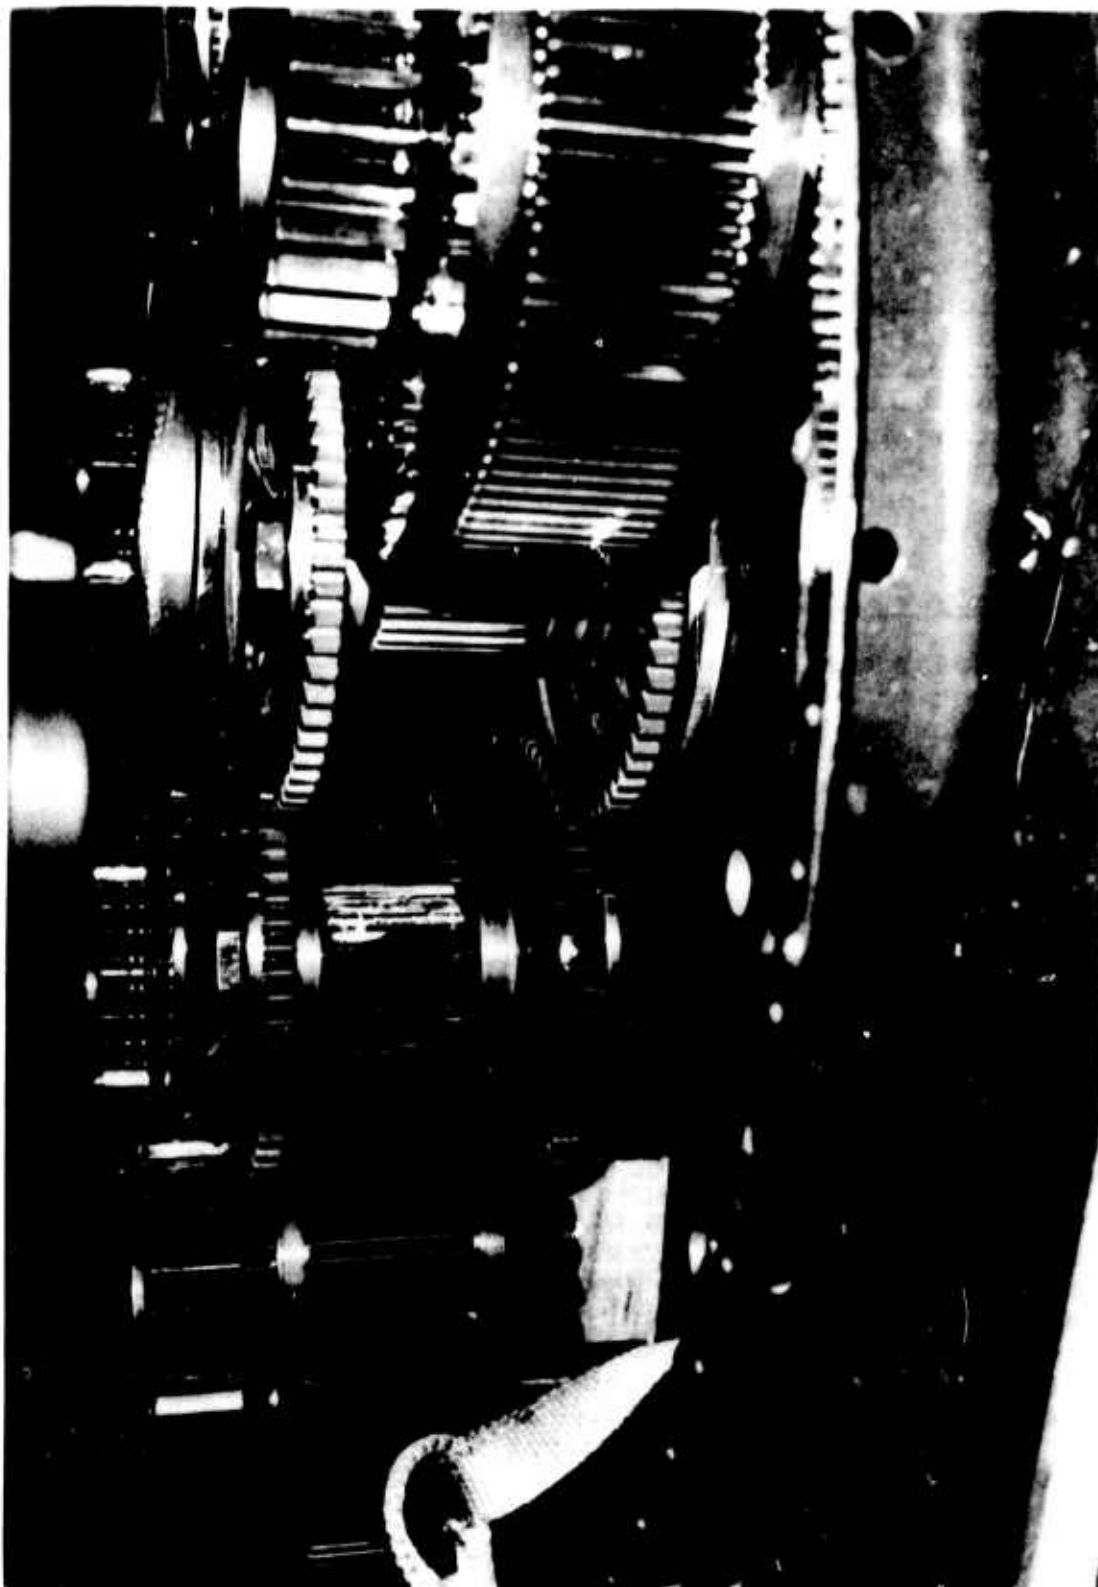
First-Row Pinion Damage - Roller Gear Unit.
